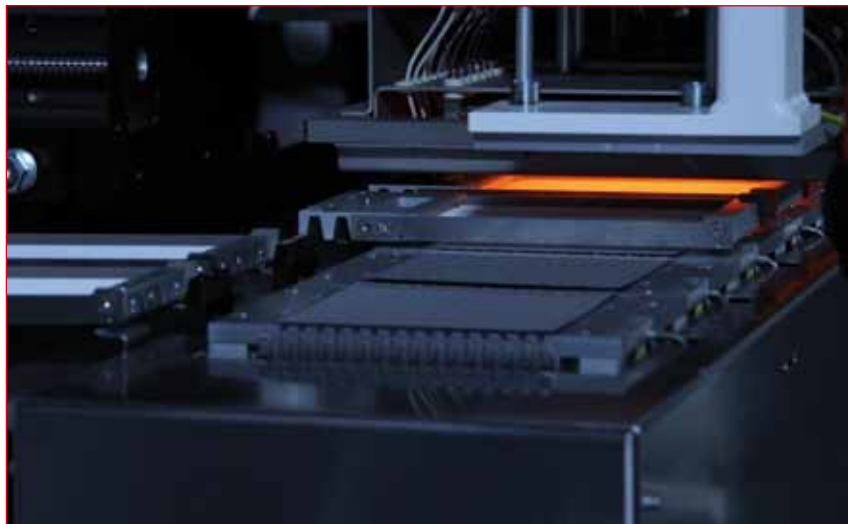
Multi-busbar connector: cell vacuum chucks and the IR soldering unit for the soldering process.
